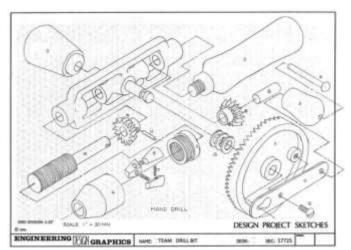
FREEHAND SKETCH OF A HAND DRILL ASSEMBLY
